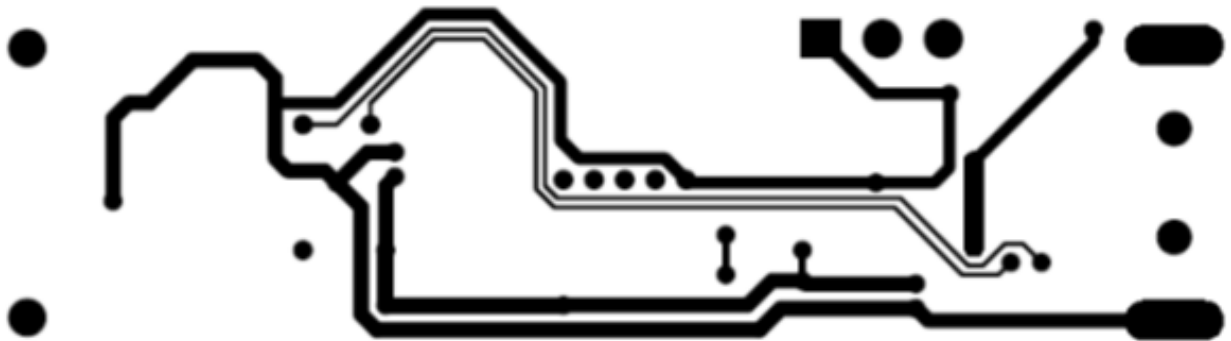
Si7013 Dongle Board Layout Bottom Layer
